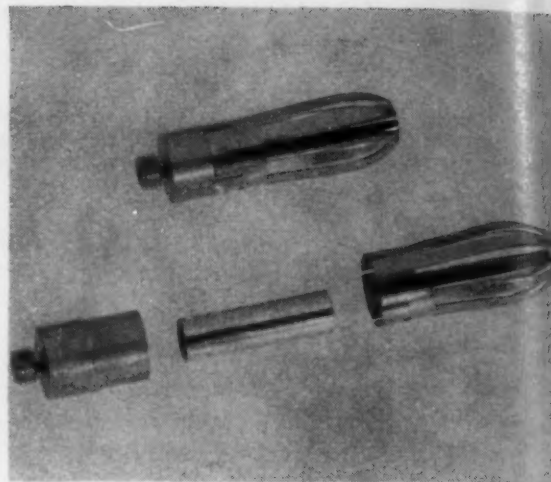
Completed bullet spring clamp at the top is made from the three components shown below. The formed beryllium strip at the right is 0.025 in. thick.
